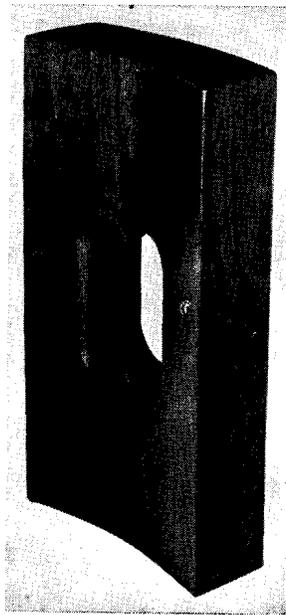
Photograph of Gothic Exhaust Port with Rounded Side Edges.
